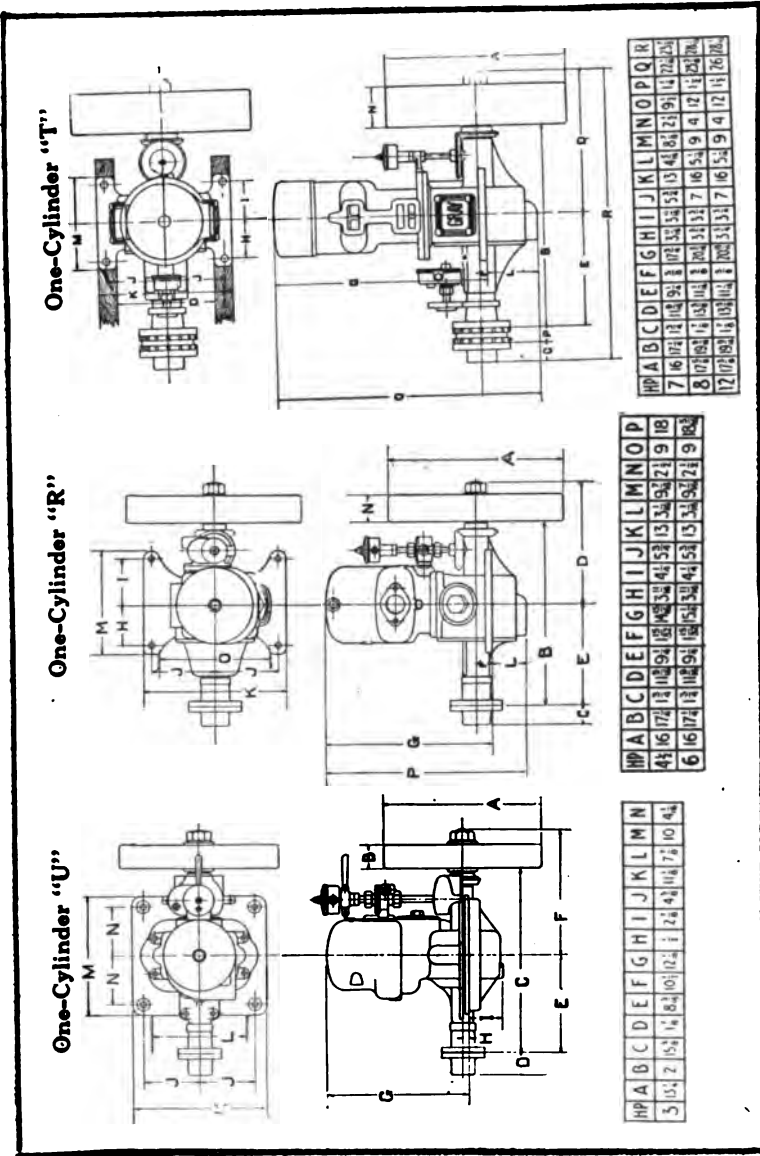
Tables giving principal dimensions of the Gray one-cylinder marine motors in three main types.
